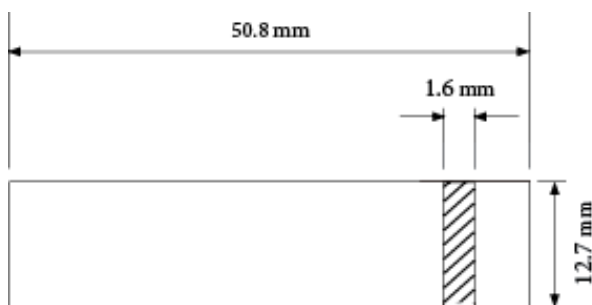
Dimensions of the test specimen for bending according to ASTM D790.
